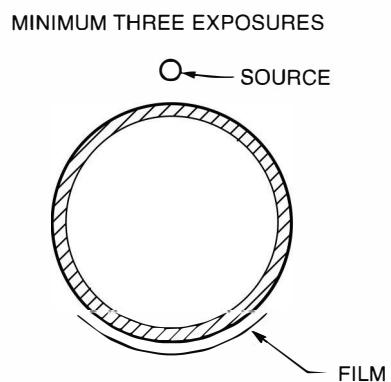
Double-Wall Exposure—Single-Wall View (see 10.28.1.2)
